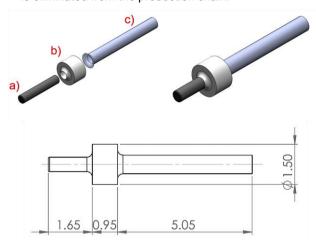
Micro assembly three dimensional model and main dimensions in mm. (a): Magnet rod. (b): TPE micro-ring. (c): Aluminum cantilever.
